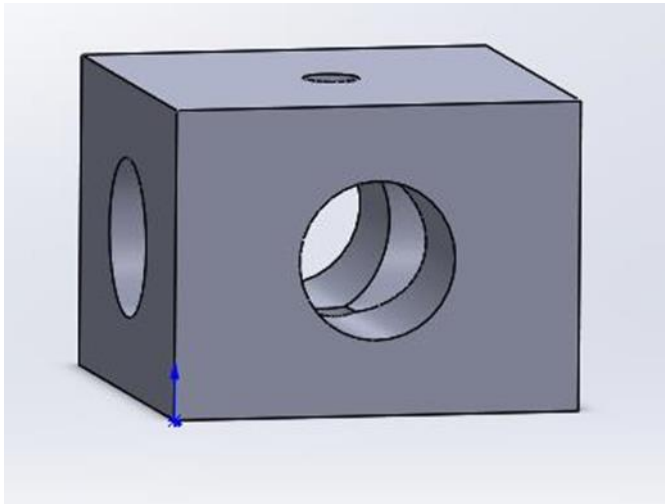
demonstrates the maximum available hole depth. The depth of the hole must be smaller than 24.6 mm. Otherwise, the CFRP tubes will influence each other during the assembly process. The CFRP tubes should avoid making any physical contact with each other tubes.
